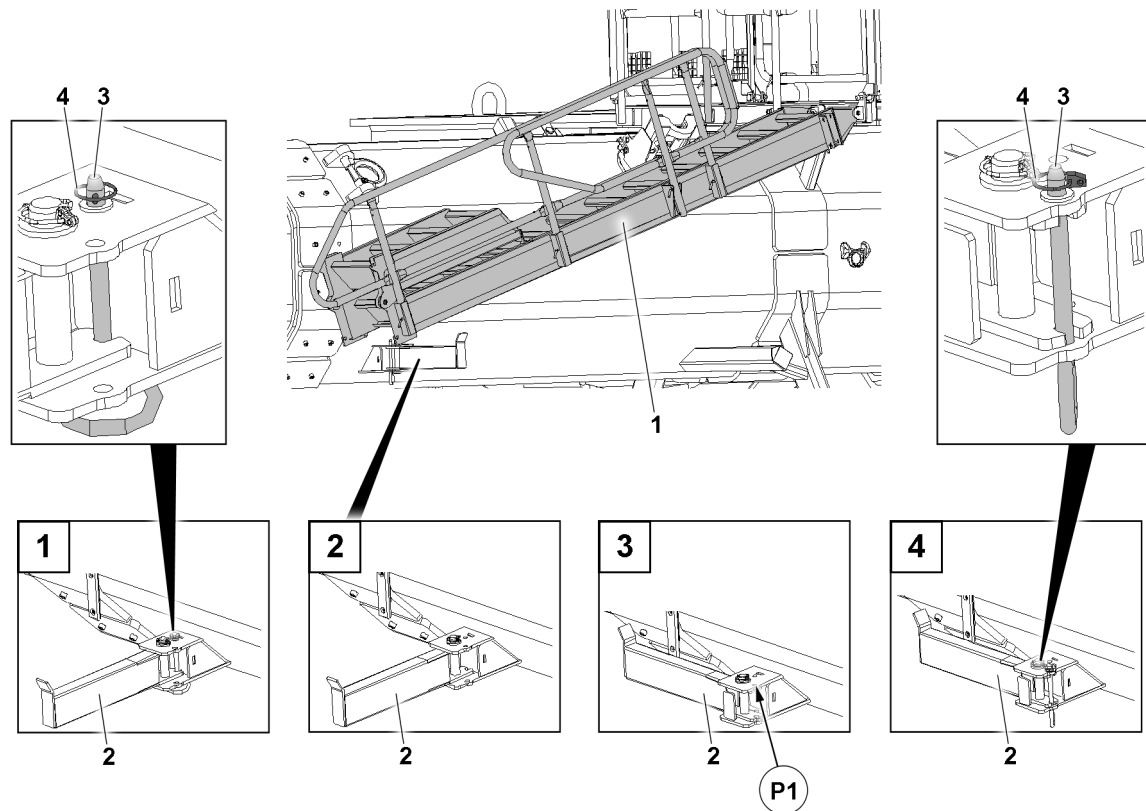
Assembling the ladder in the operating position — assembling the bracket in the transport position
